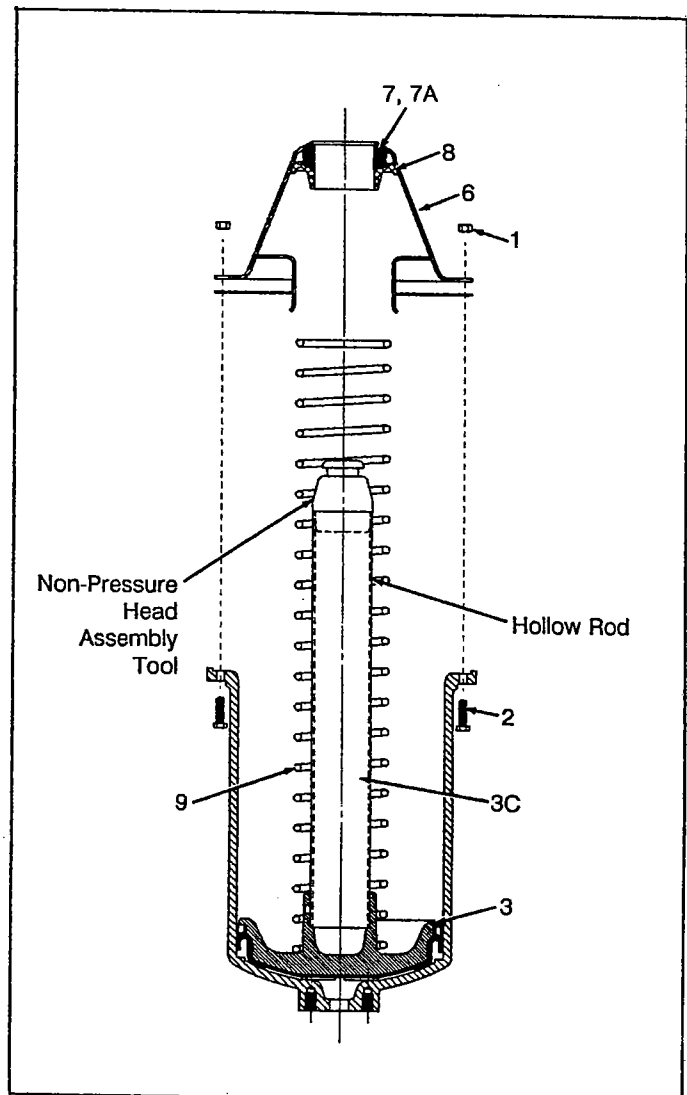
NON-PRESSURE HEAD ASSEMBLY TOOL USE
